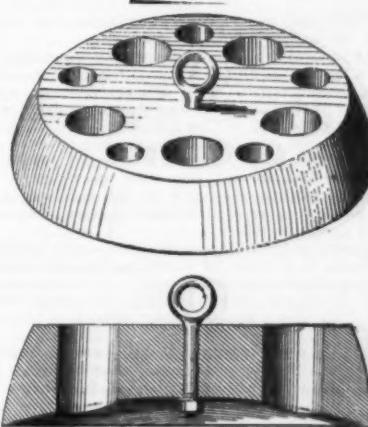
SOUNDING LEAD, ELEVATION AND SECTION.
